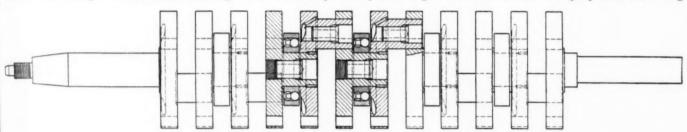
Built-up Crankshaft of the Acédés Racing Car
